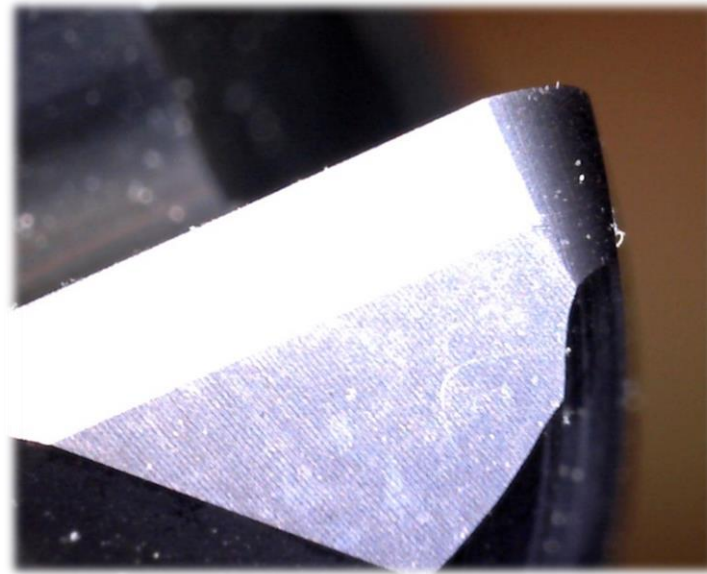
An image of the cutting edge of a Z-Carb end mill before it has been used to cut any material
